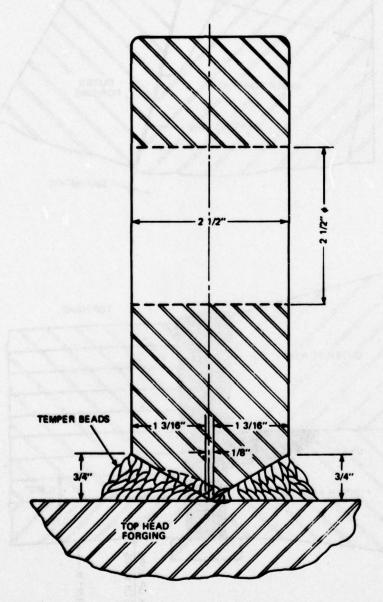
Welding Details for Head Lifting Lugs
